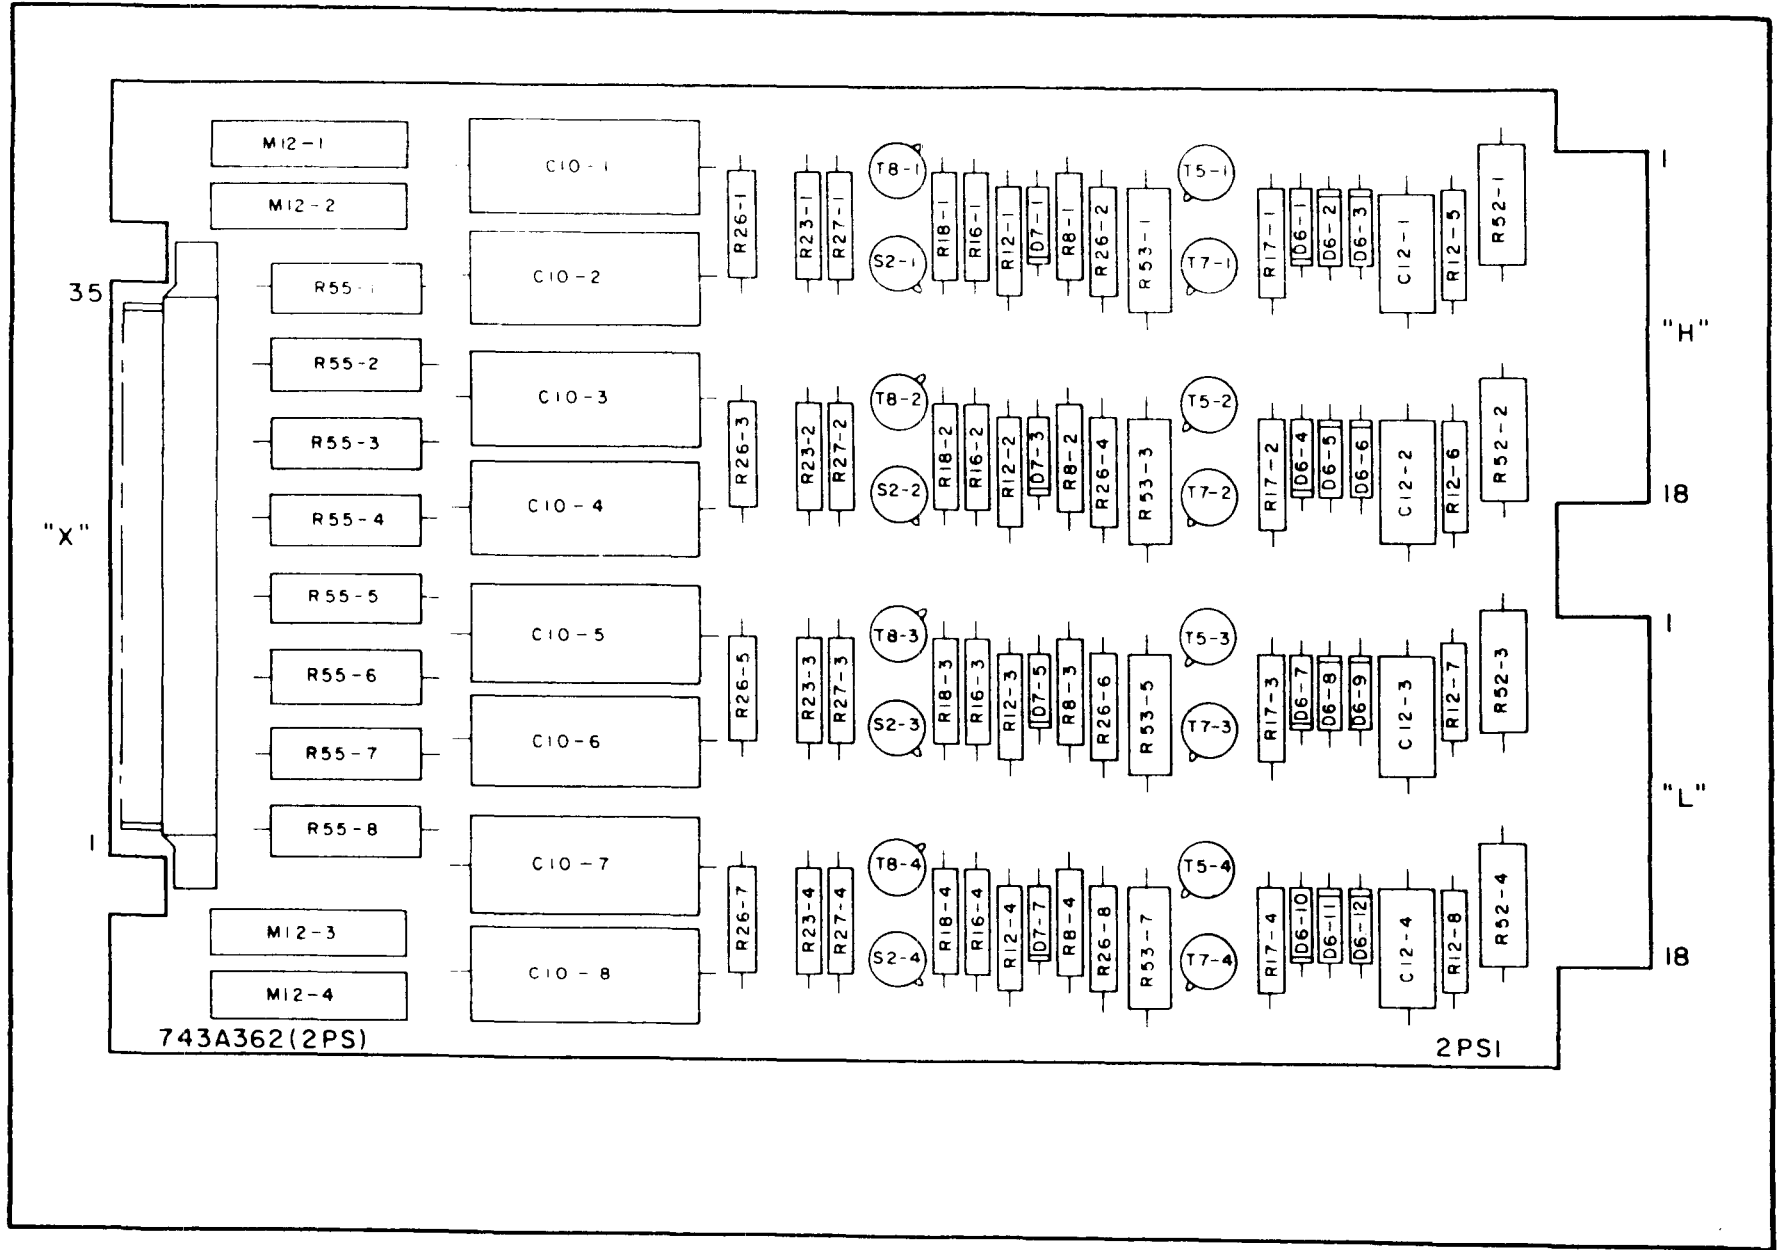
2PS1 ASSEMBLY (REF. DWG. 743A362, SUB 6)
